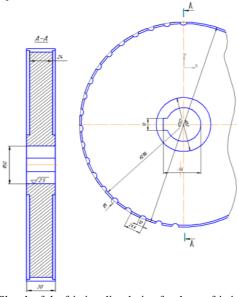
Sketch of the friction disc design for thermofriction processing of cylindrical surfaces
